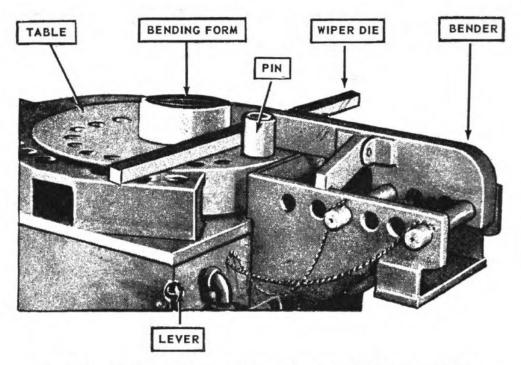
Wallace No. 47 hydraulic reinforcement bar bending machine.
